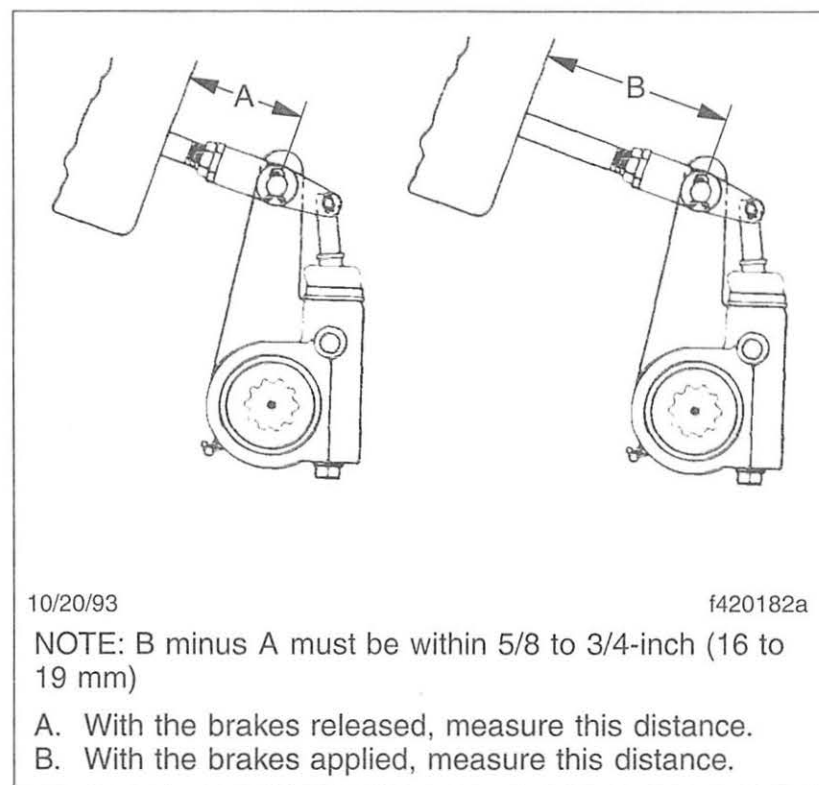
, Brake Stroke Check, Rockwell Automatic Slack Adjuster
